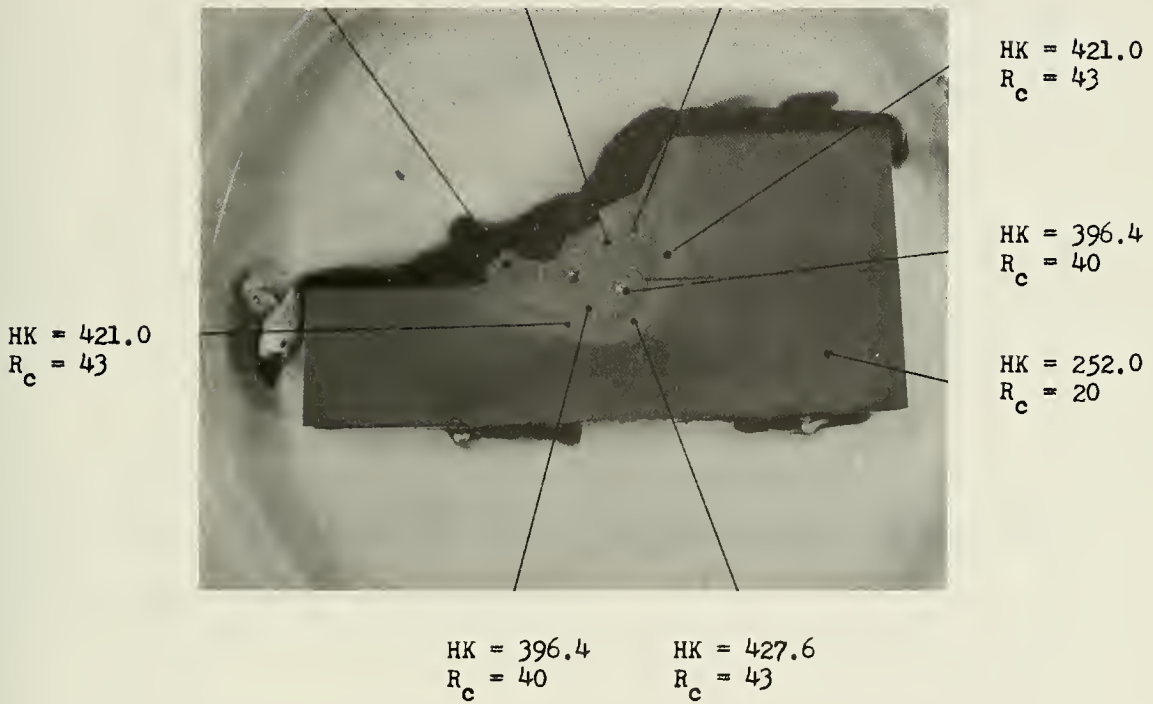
OVERHEAD WELDED MICROHARDNESS TEST SPECIMEN
